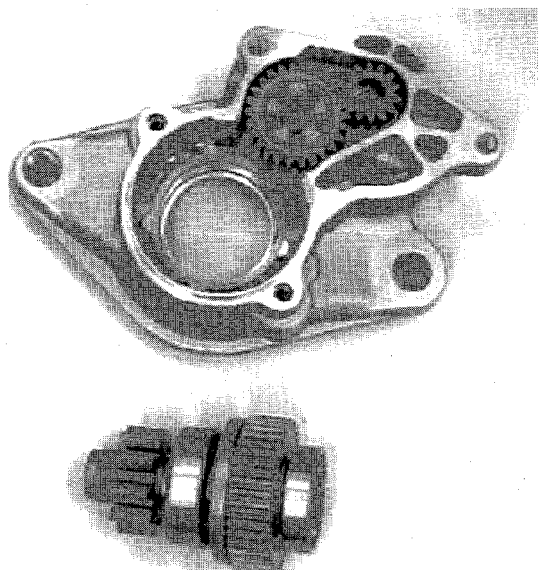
Gear Mechanism for a Starter Motor Assembly.
